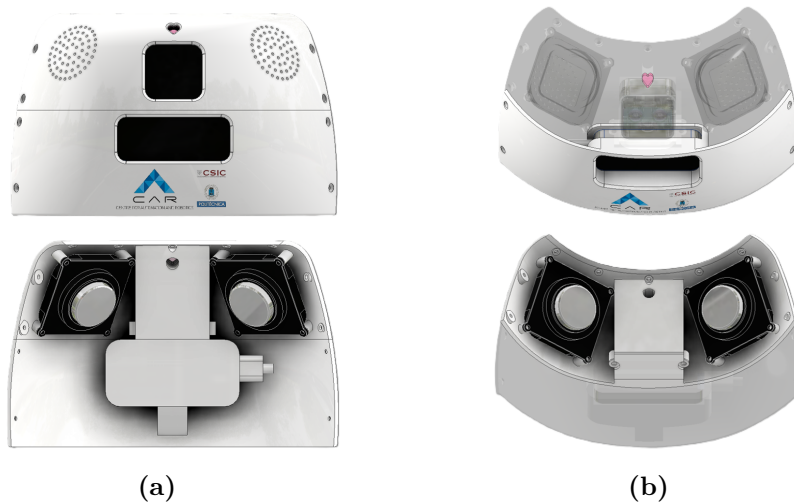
Details of the front panels: (a) Front and back views, (b) Assembly details.
